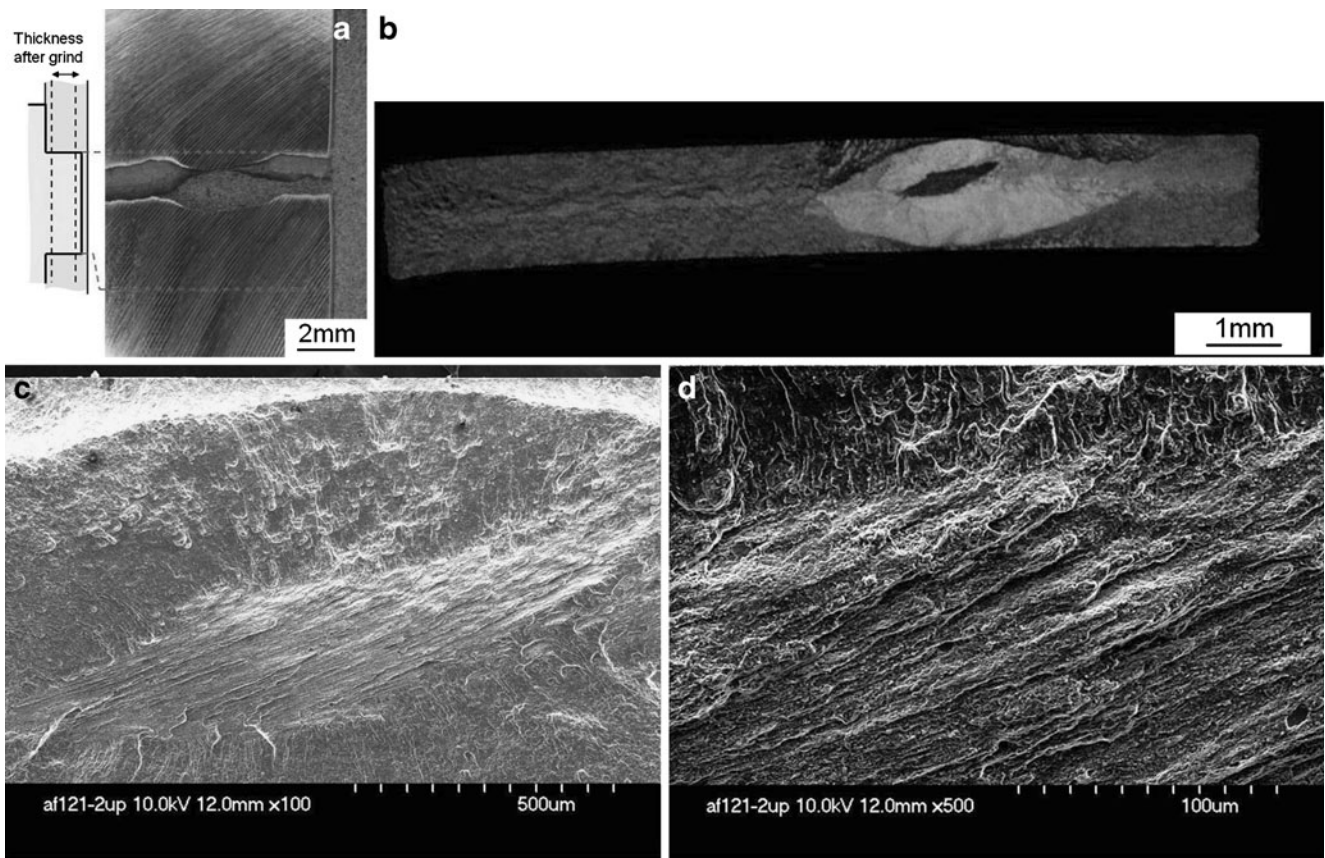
Typical fracture surface when an internal crevice is the crack origin. a Fracture location. b Fracture surface. c Fracture surface around crevice. d Fracture surface around crevice
